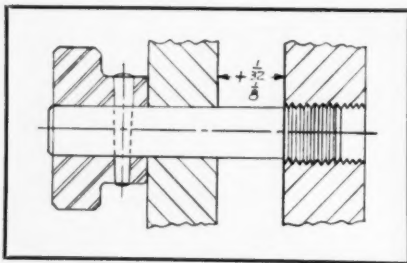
Sketch of screw-type latch that is made from piece of screw stock and provided with knurled knob.
